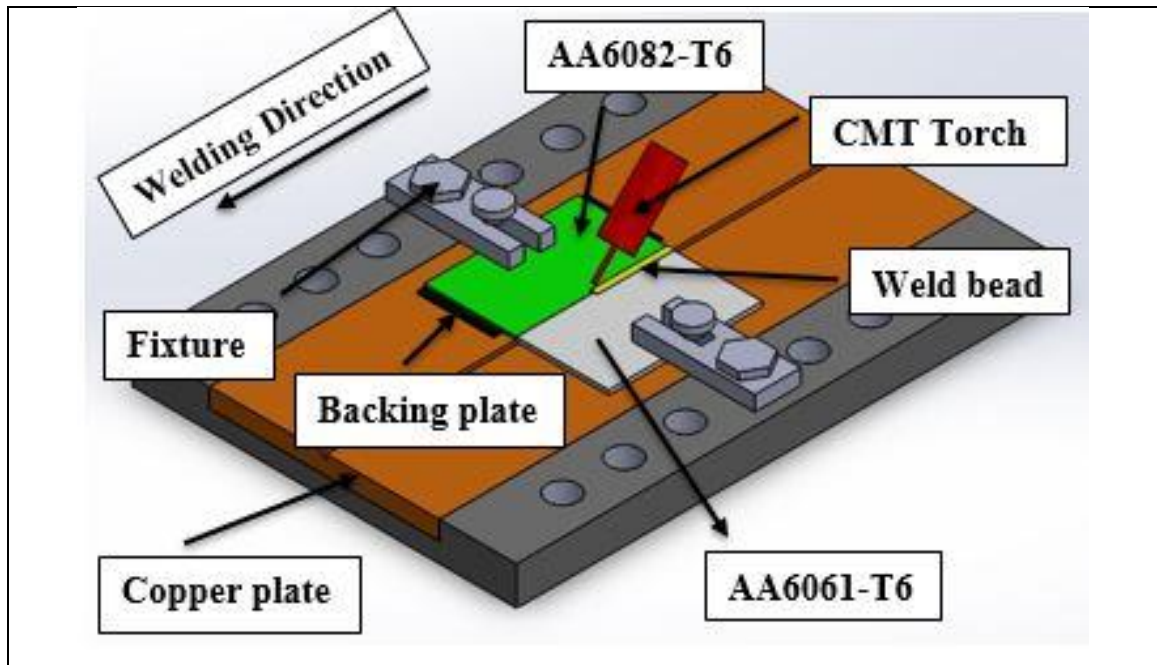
Fixture setup for bead-on-plate experiments
